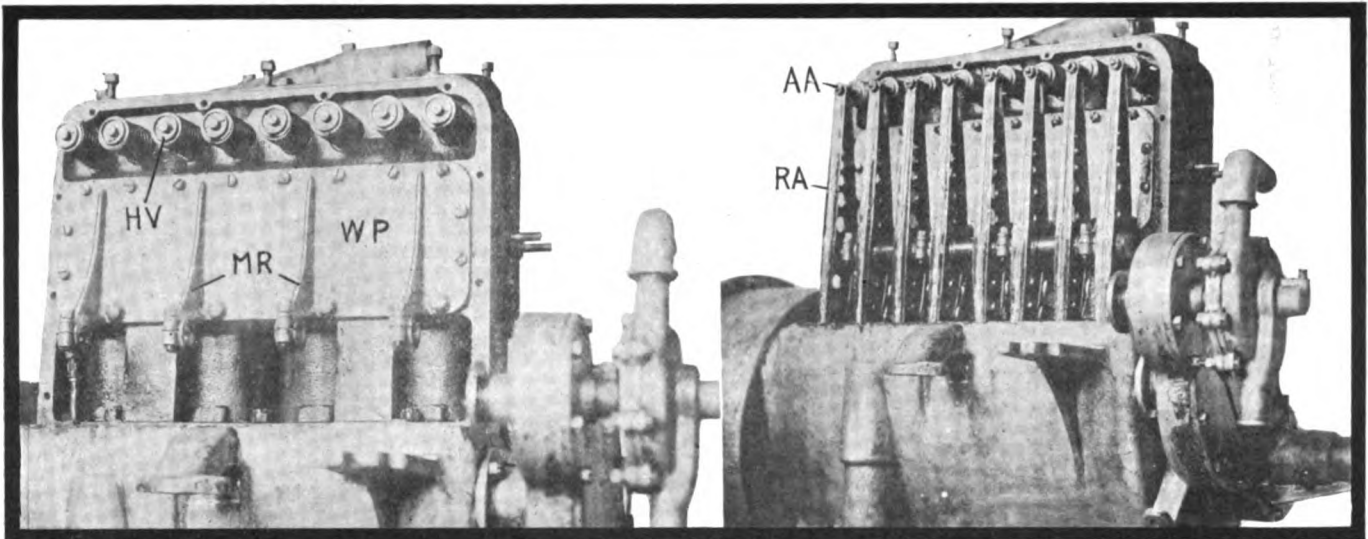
Right side of Duesenberg-Mason motor, with cover plate P, Fig. 2, removed, and showing plate WP forming the side of the water-jacket, and having bearings MR for the shaft carrying the valve rockers shown in Fig. 5
